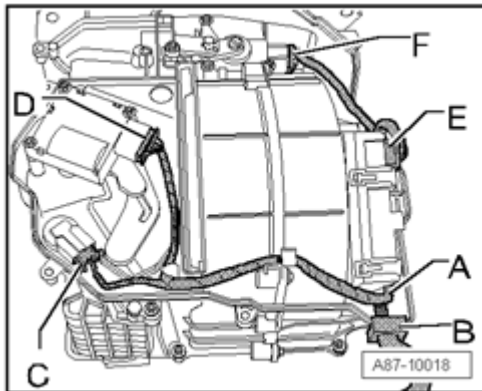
Identifying Connectors, Routing Of Wiring, And Socket
